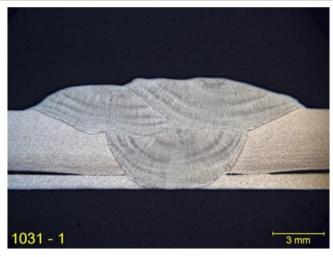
Macrograph from the robotic GMAW-P butt-joint weld produced in the 5G position
